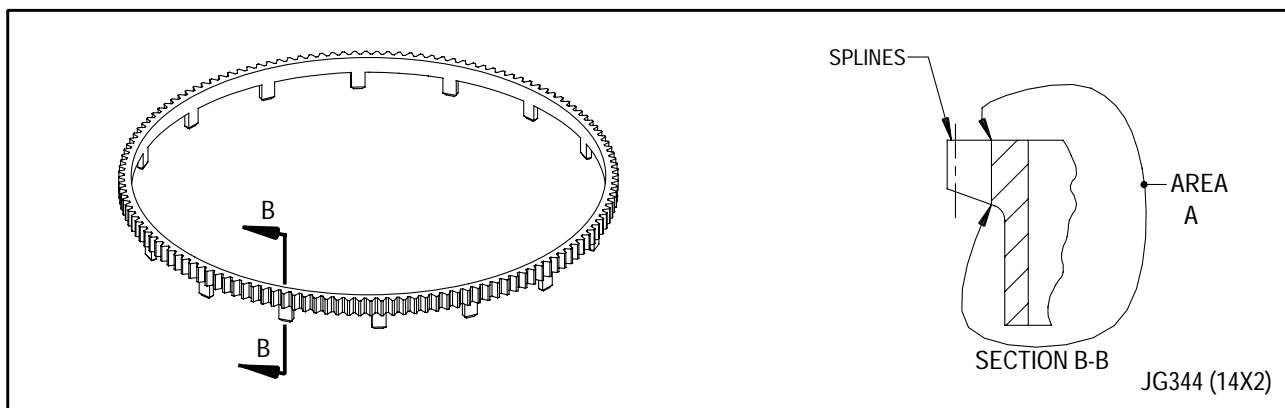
Rear Compressor Driveshaft Nut Lock - Repair
